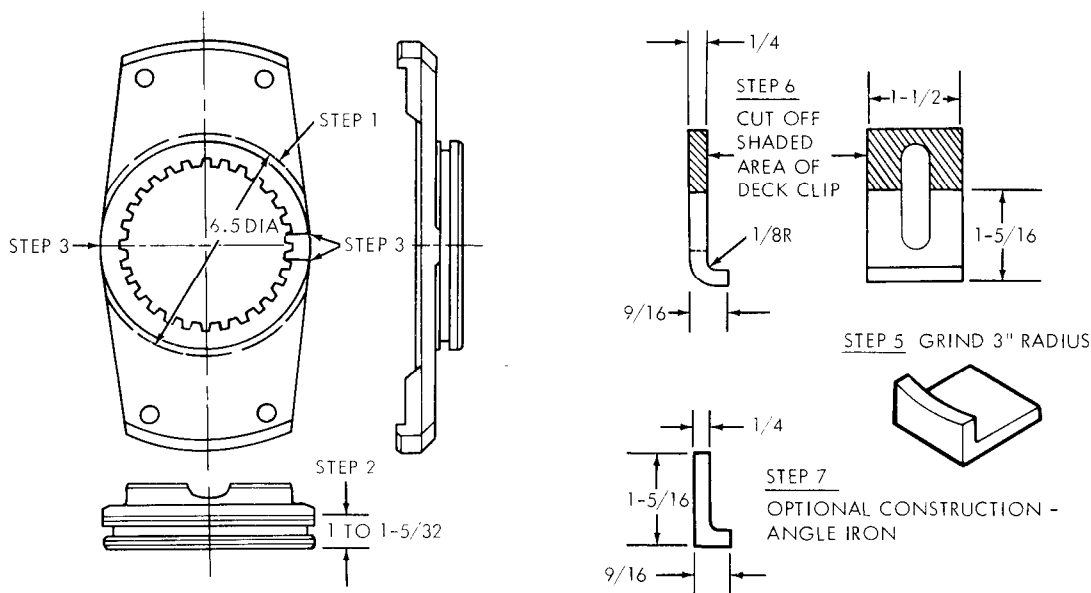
Final drive adapter hook-up tool (Sheet 1 of 2).
